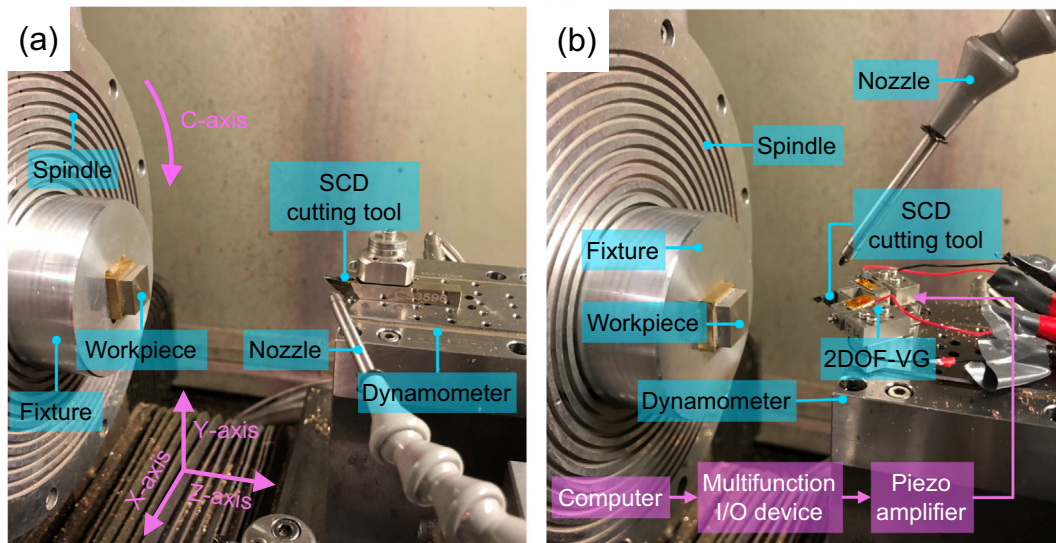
Experiment setup of (a) slow-tool-servo cutting and (b) fast-tool-servo cutting.
